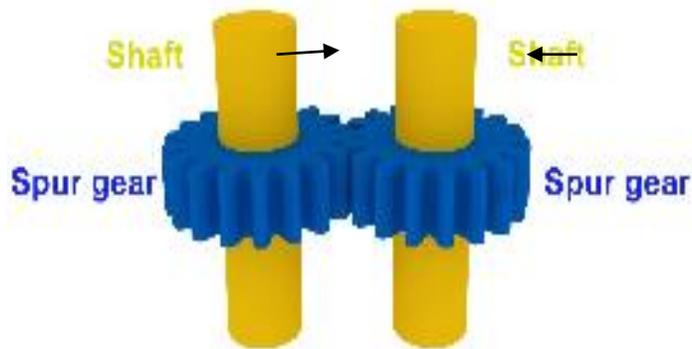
(i) Figure shows shafts and meshing of spur gear.
